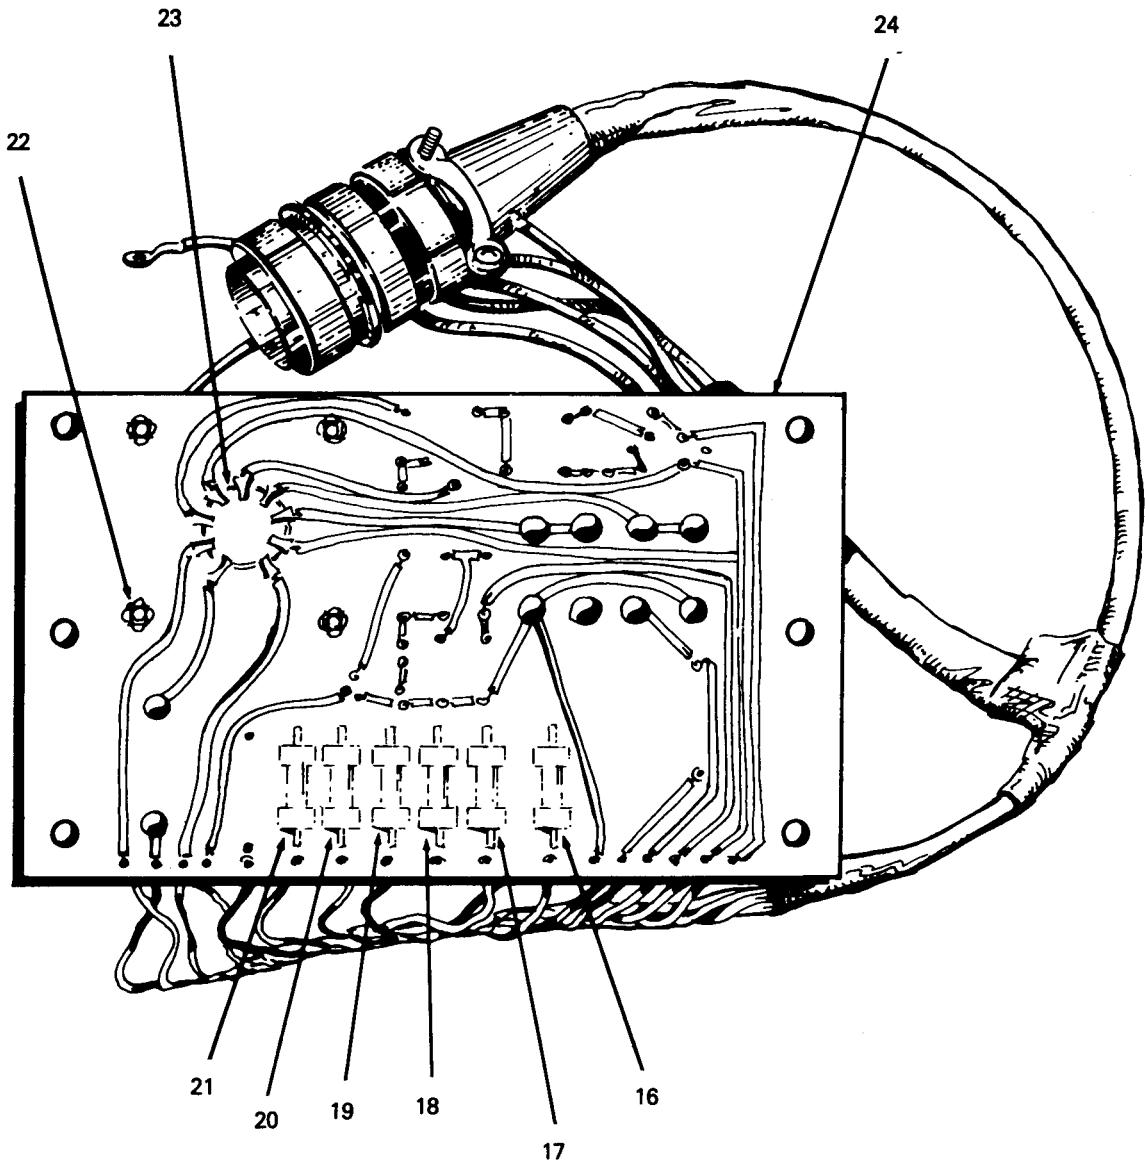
Circuit Board Assembly (Sheet 2 of 2)
